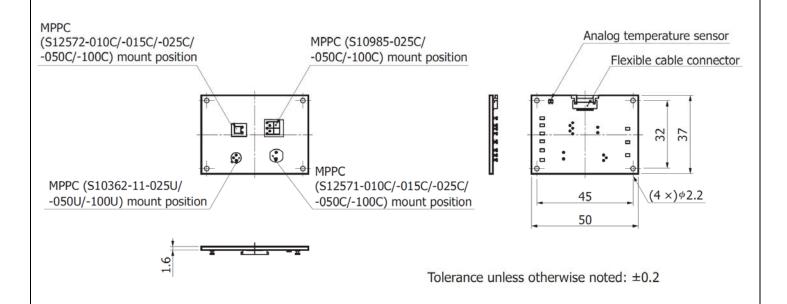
Sensor board dimensional outline (Unit: mm)
